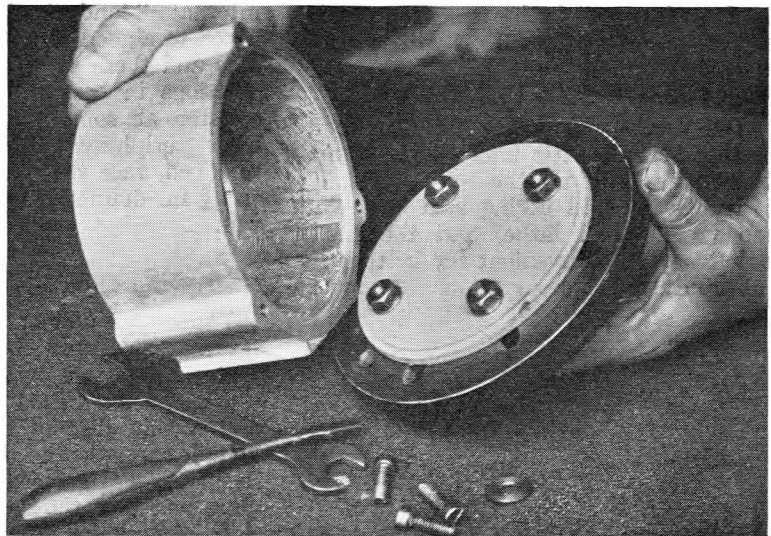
REGISTERING THE JIG FOR MACHINING THE CARCASE.
